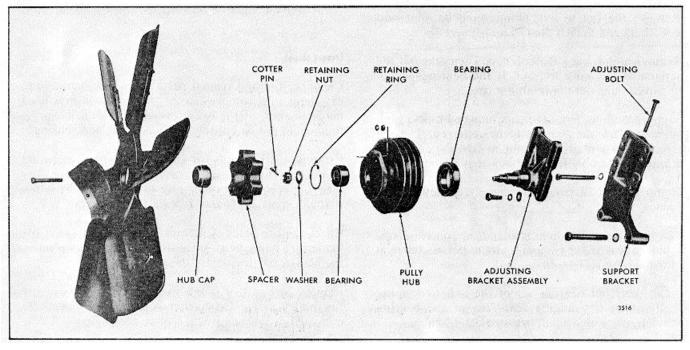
Typical Fan, Three Groove Pulley Hub and Adjusting Bracket Details and Relative Location of Parts
